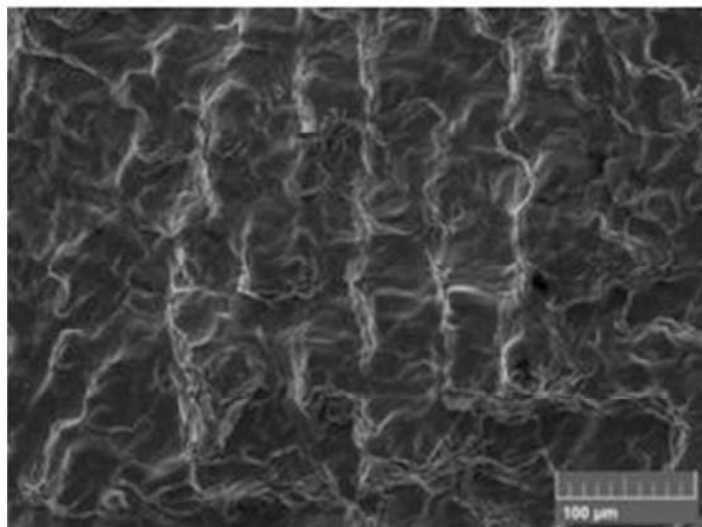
SEM micrograph of fractured surface for the hot crack specimens produced by weld metal A and high current (280 A)
